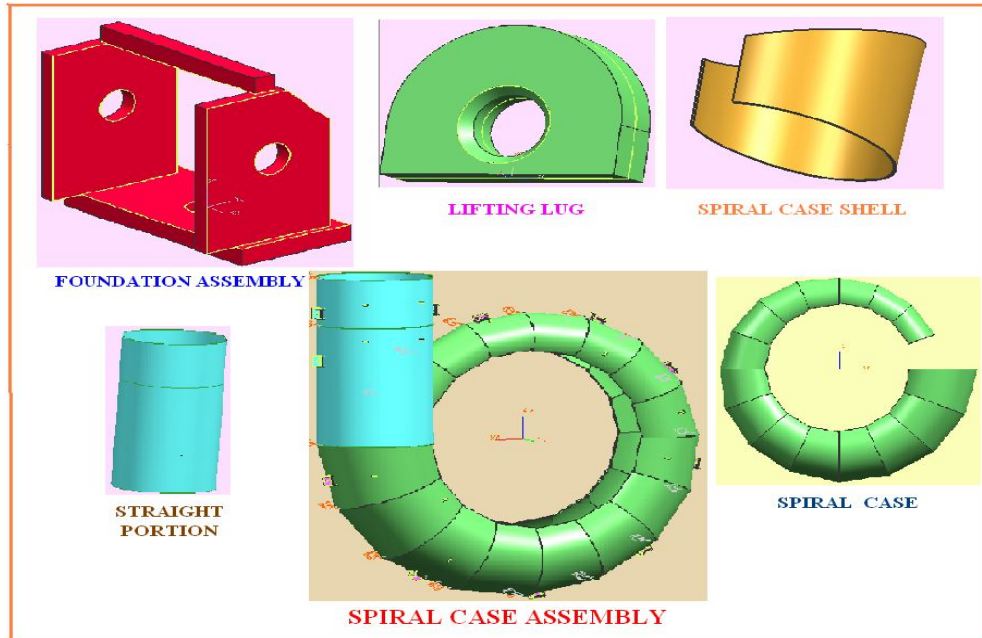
3-D geometry of Spiral Case Assembly and Sub Assemblies.
